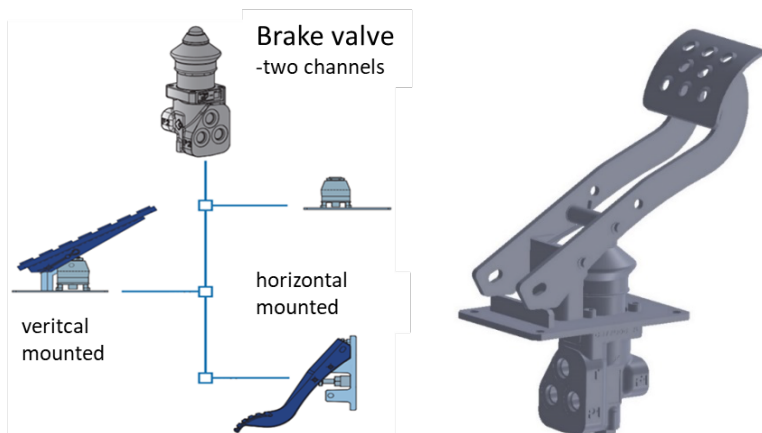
Vertical and horizontal mounting of the brake valve (on the left) and the tester (on the right) [4].
